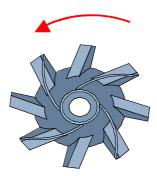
The rotor's direction of rotation in a pulper with one rotor (STOA009543)
